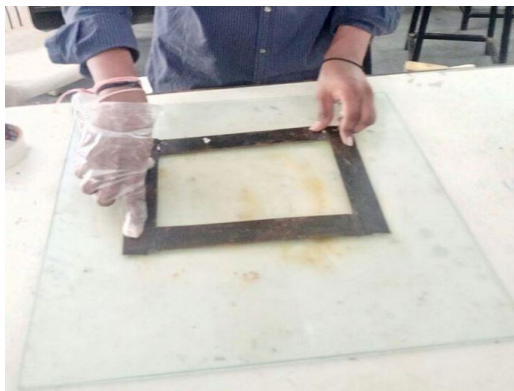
ADJUSTING THE MOULD ON THE GLASS PLATE
